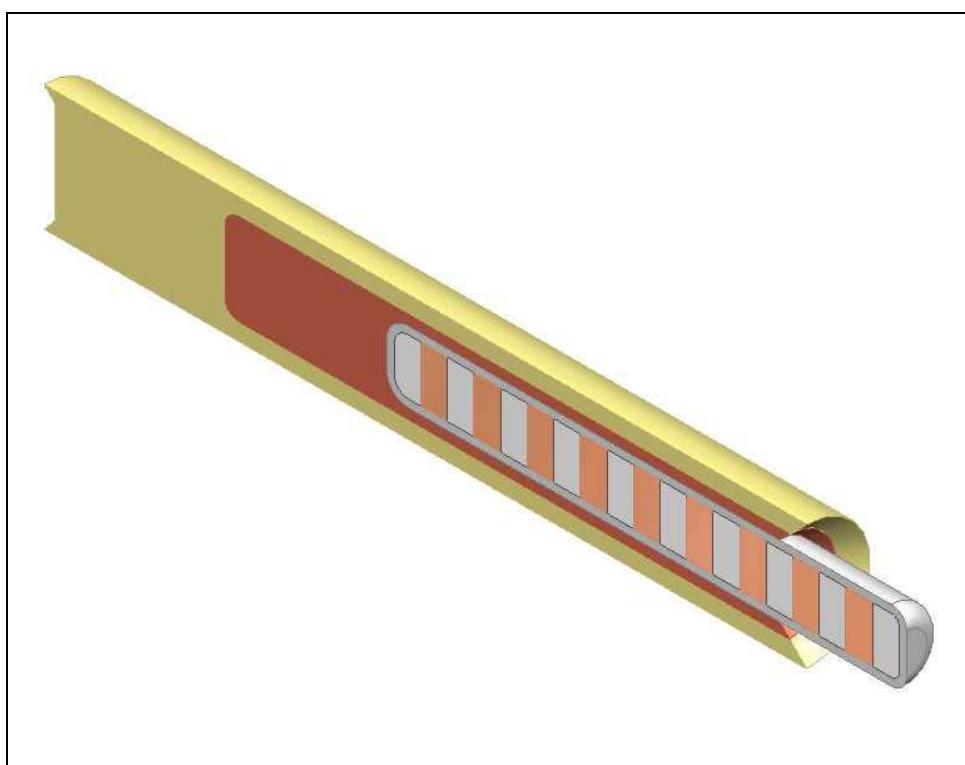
Assembly picture with 10 segments in a reduced length sabot
